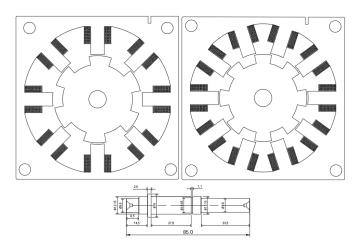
Rotor and stator of 6/8 and 8/10 pole SRM.
